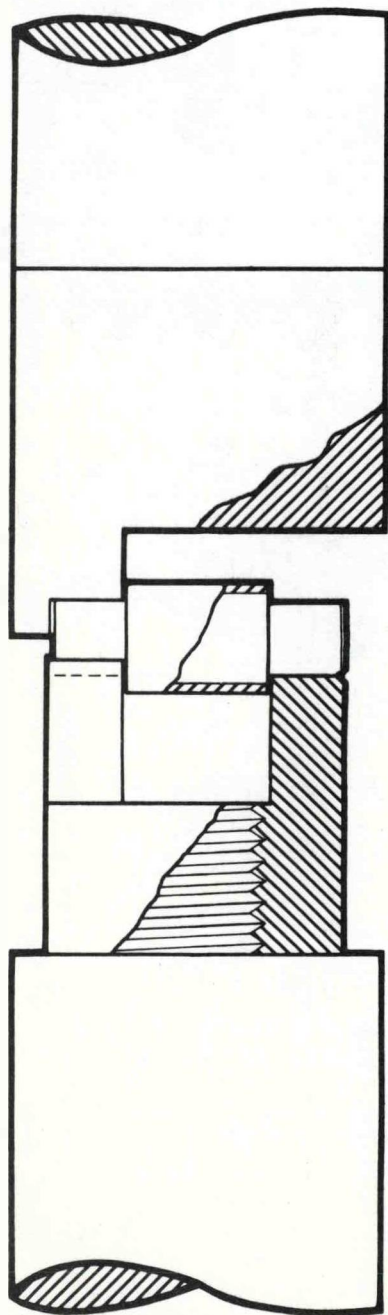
Absorber Panel Transverse Bend Test Fixture
